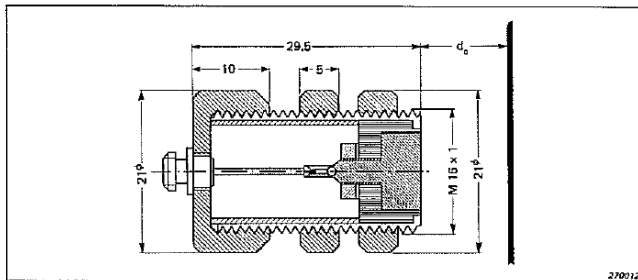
Cross section view of the Capacitive Transducer with indication of the main dimensions in mm (1 mm = 0,0394 in)
